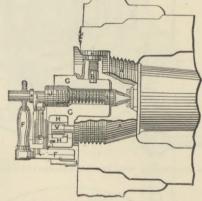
" B 'or Single Motion Mechanism. (For lettering see Fig. 22.)
